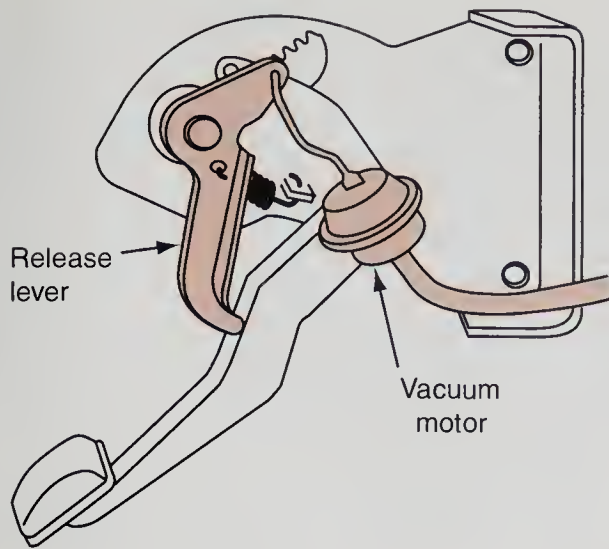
A typical foot-operated parking brake with a vacuum release mechanism.
